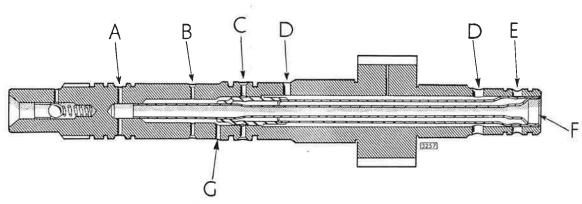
Longitudinal section of the forward sun gear showing oil ways. A, F—Front clutch: C, E—Rear clutch: B, D, G—lubrication.
